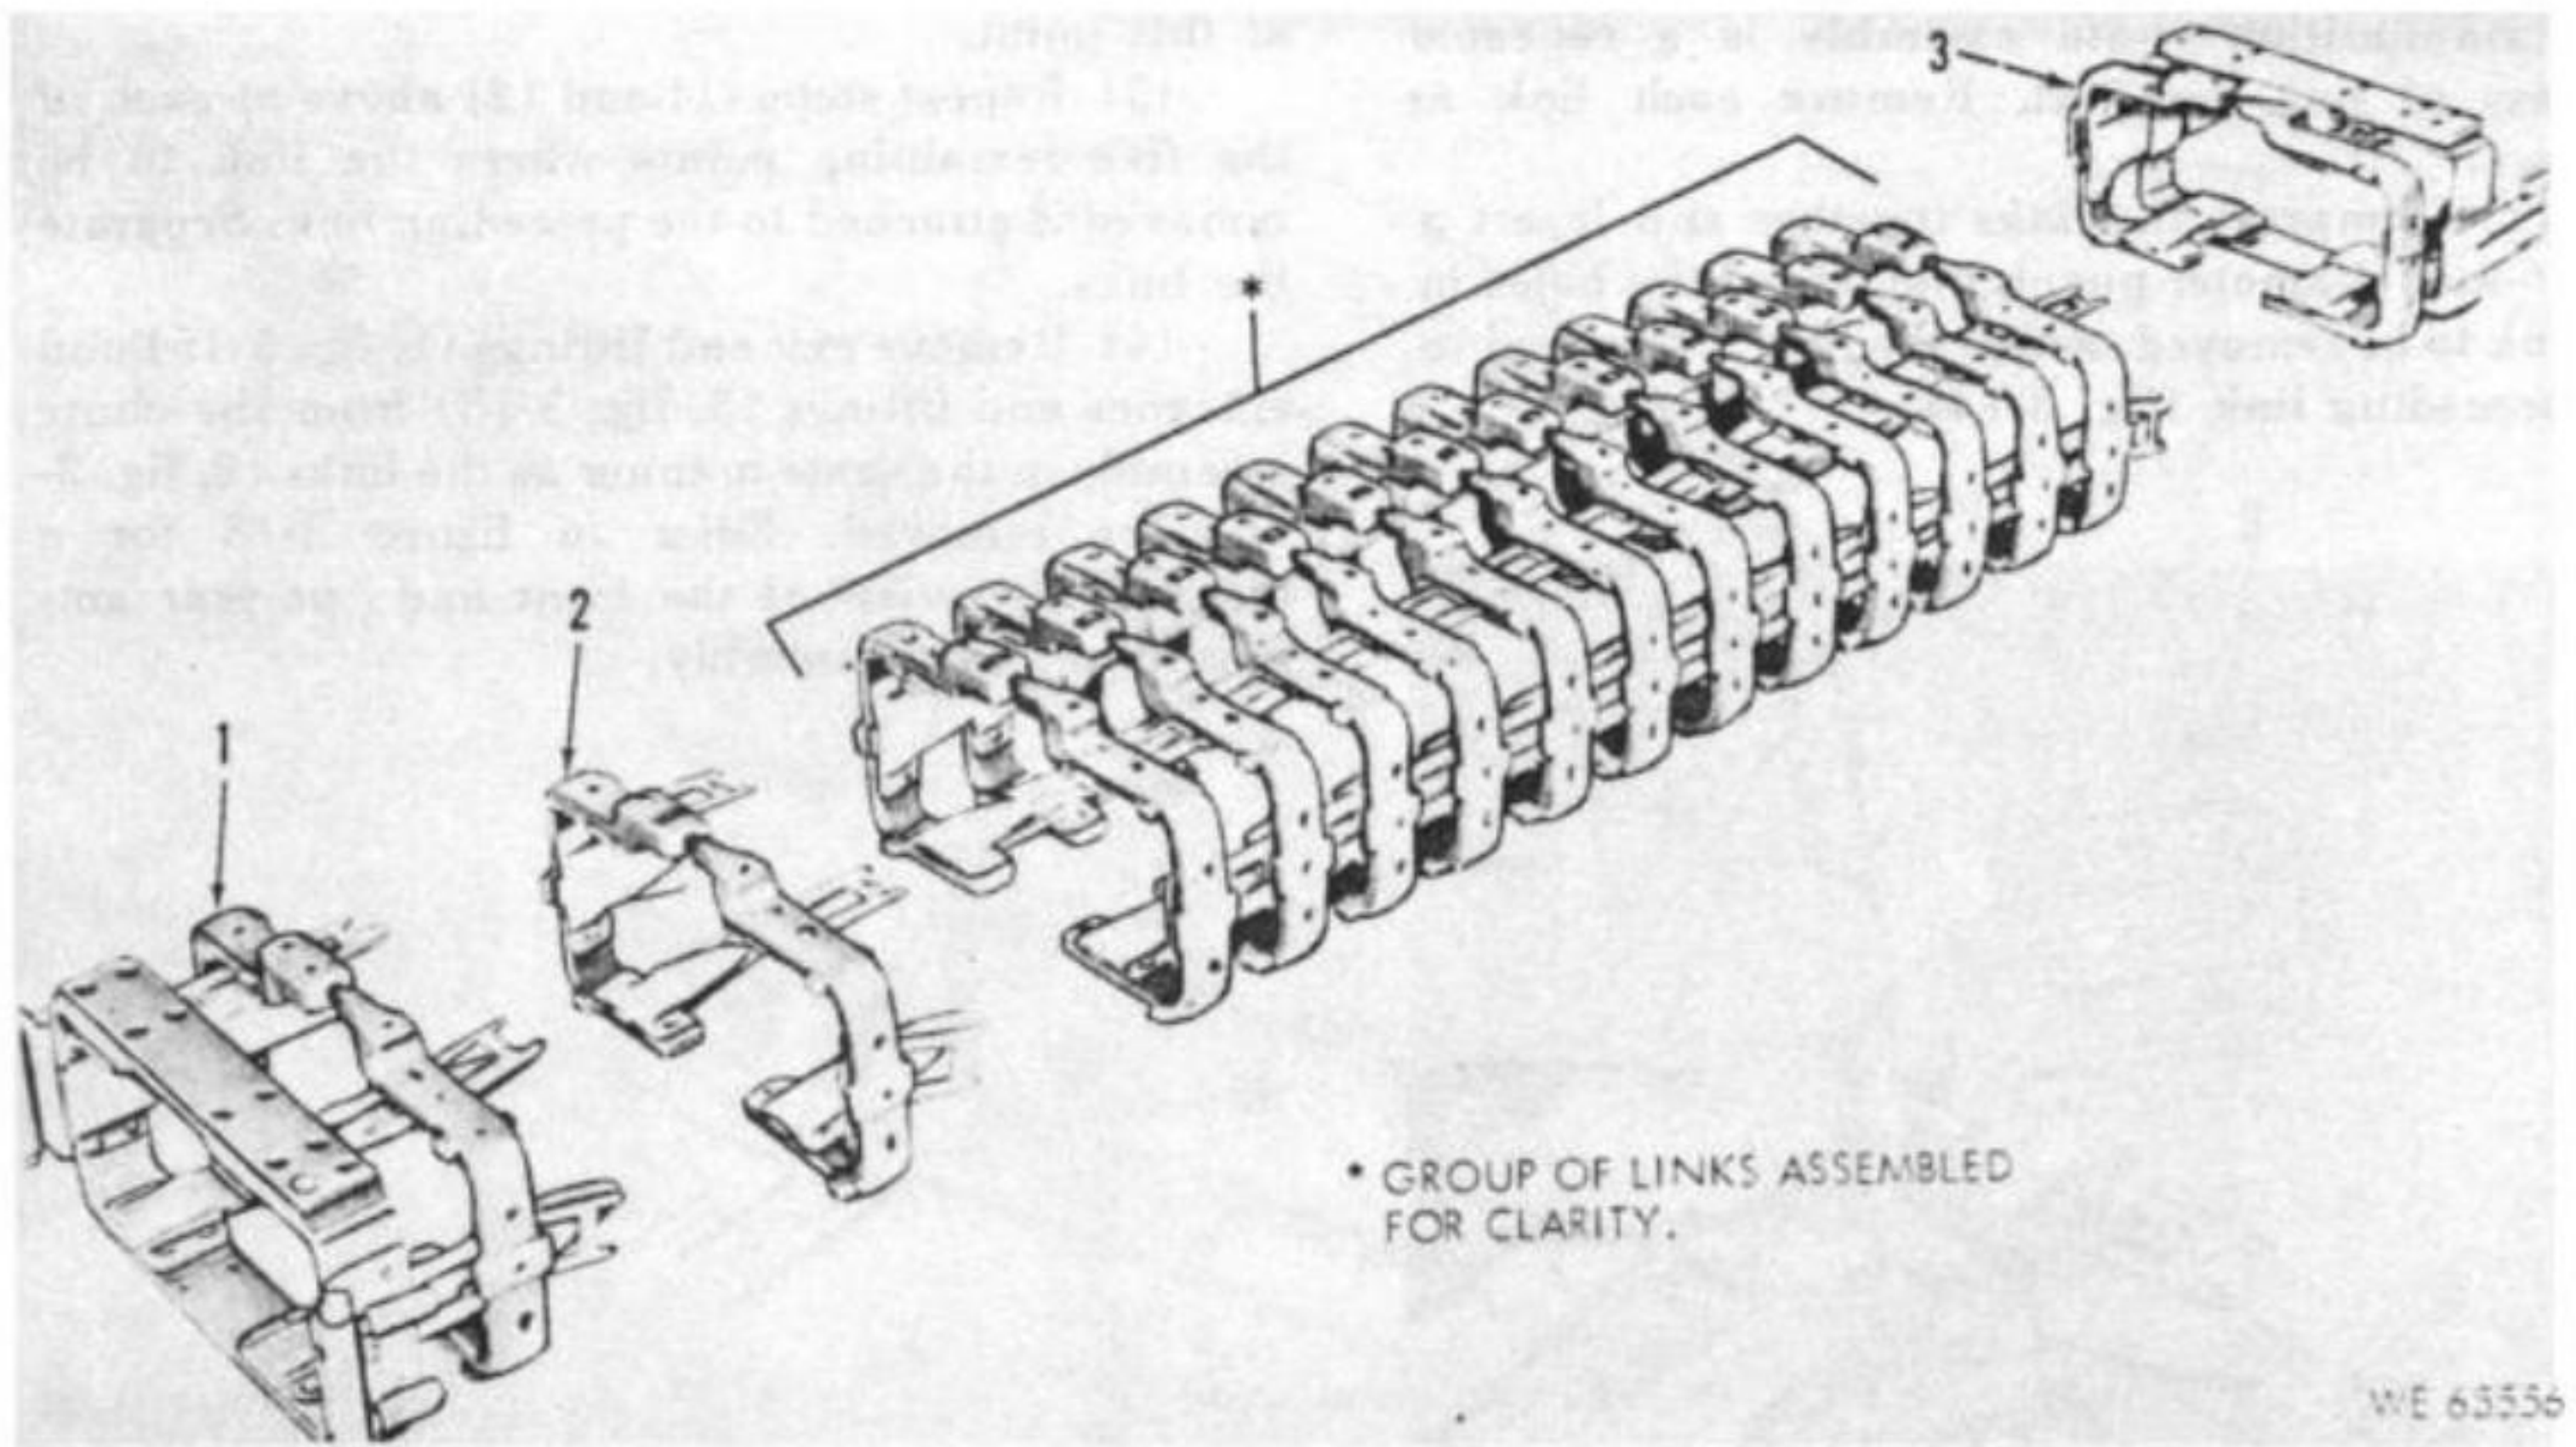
Assembly / disassembly of link on front or rear ammunition chute assembly.
